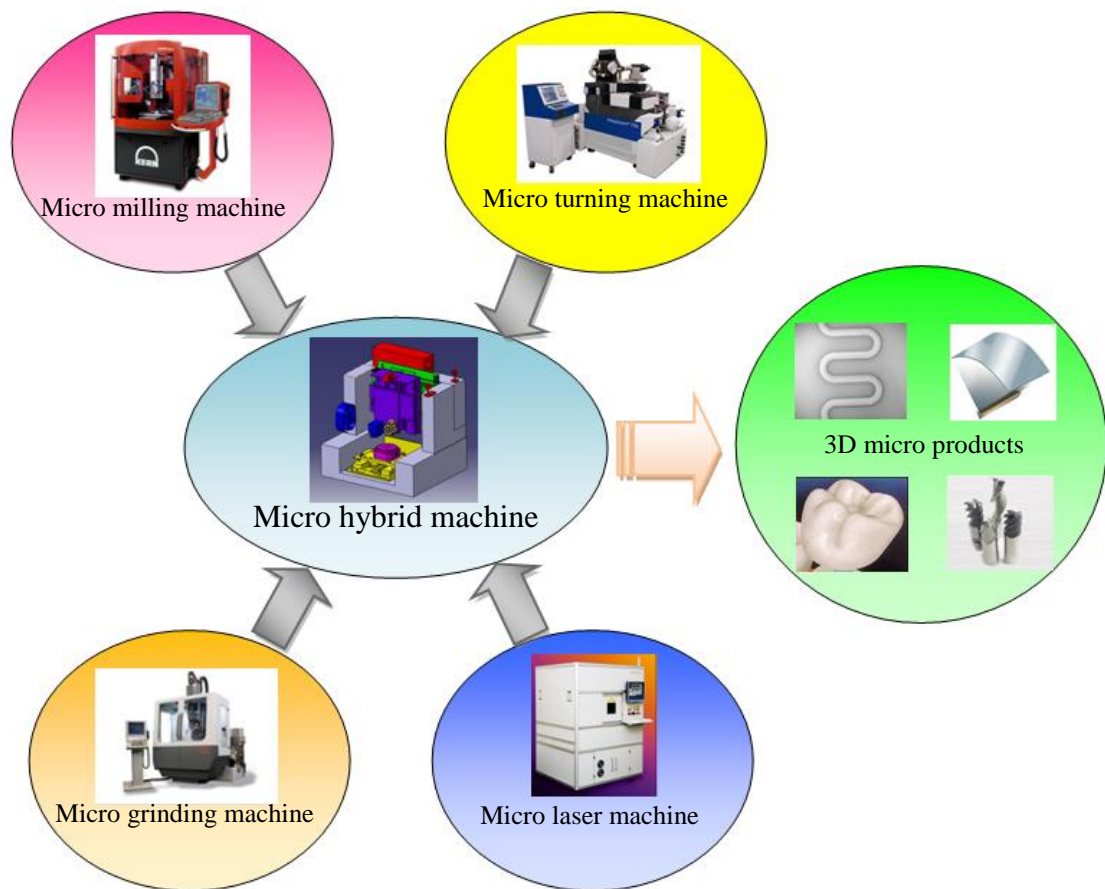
Schematic of an idealised hybrid machine tool hosting four different machining processes for the fabrication of 3D micro products
